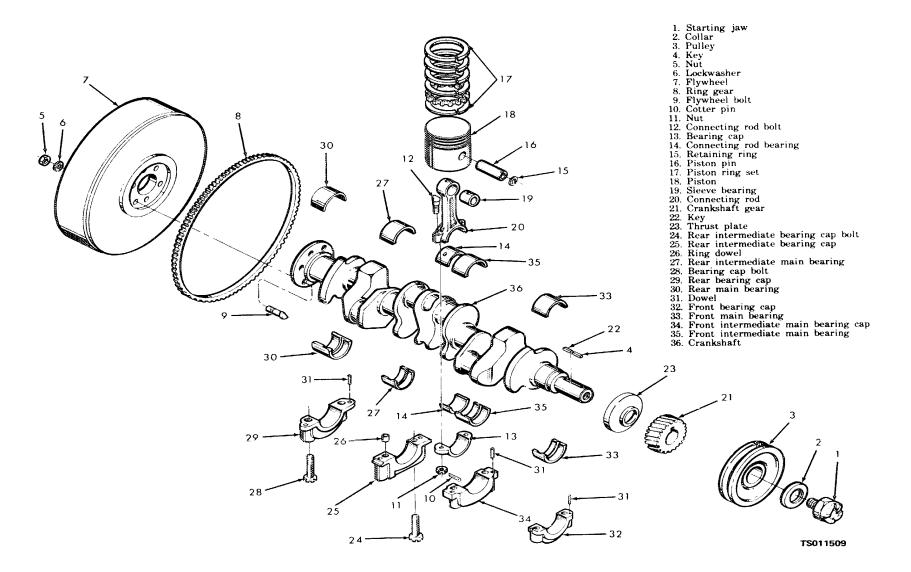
Piston, crankshaft, and flywheel, exploded view.
